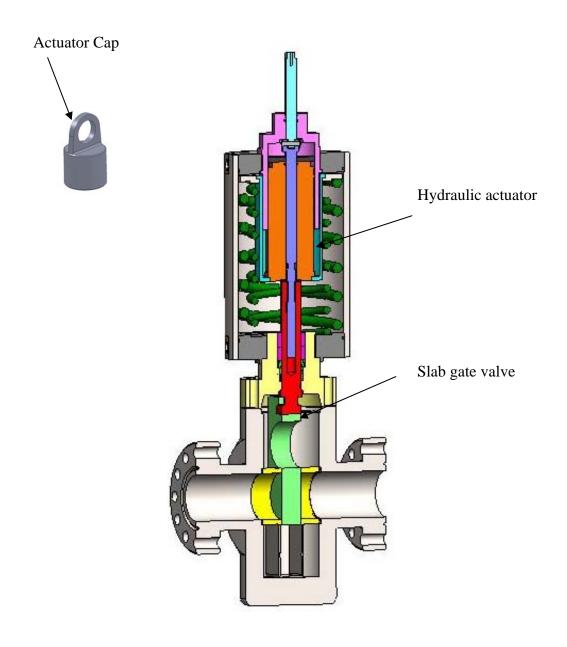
Hydraulic Actuated Gate valve (Safety Valve)
